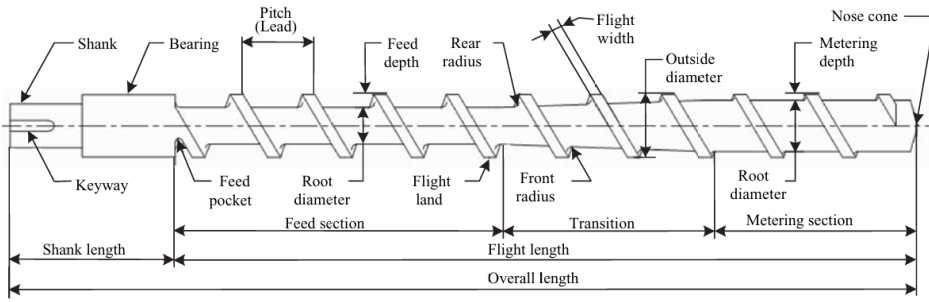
Schematic illustration of geometrical parameters on a single flighted screw [10].
